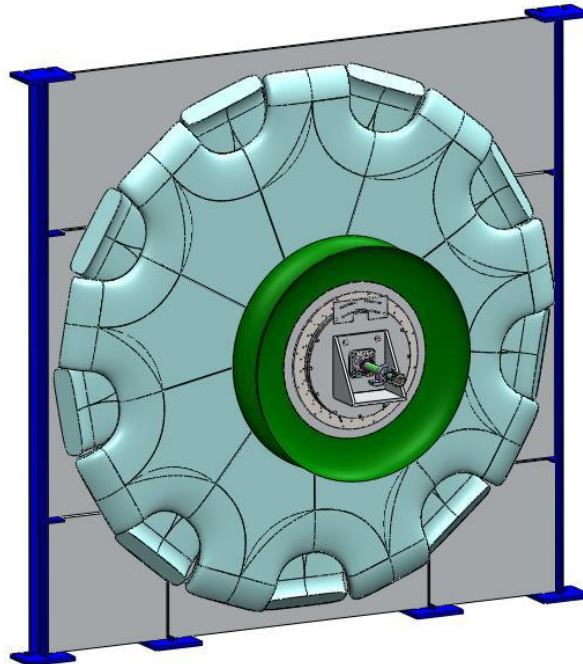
THREE-DIMENSIONAL REPRESENTATION OF THE TETRA-RADIAL TURBINE TEST RIG
